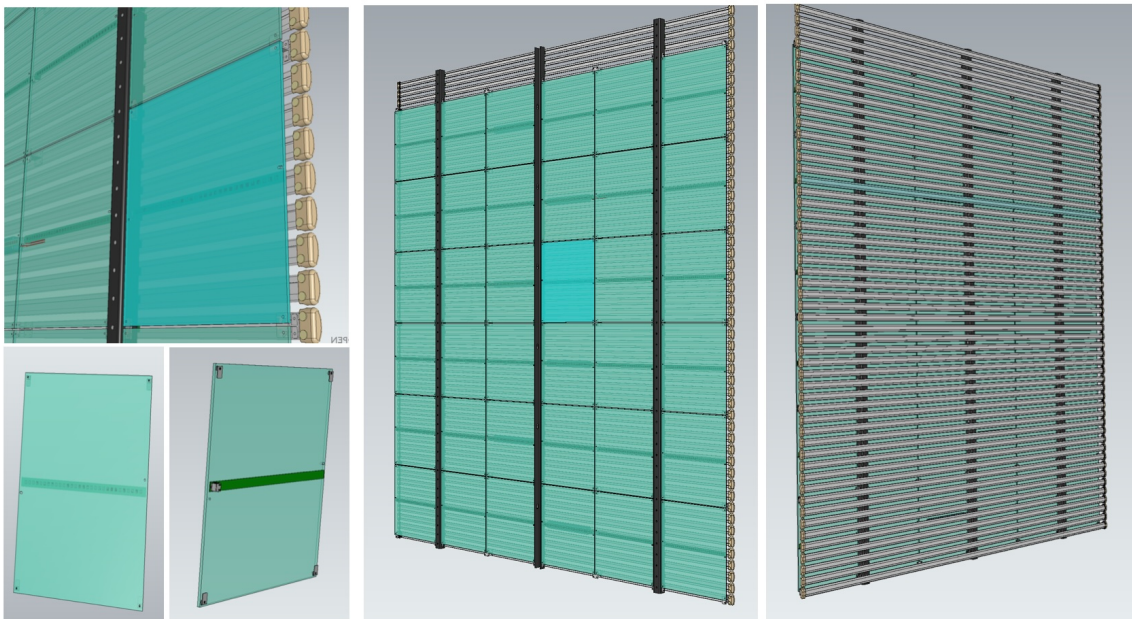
An APEX panel. Top left: one PD module installed on field cage profiles. Bottom left: a PD module equipped with a SiPM strip at the center. Center: front view of an APEX panel showing the 6×6 array of PD modules mounted on an field cage module. Right: a back view of the field cage module showing its aluminum profile structure.
